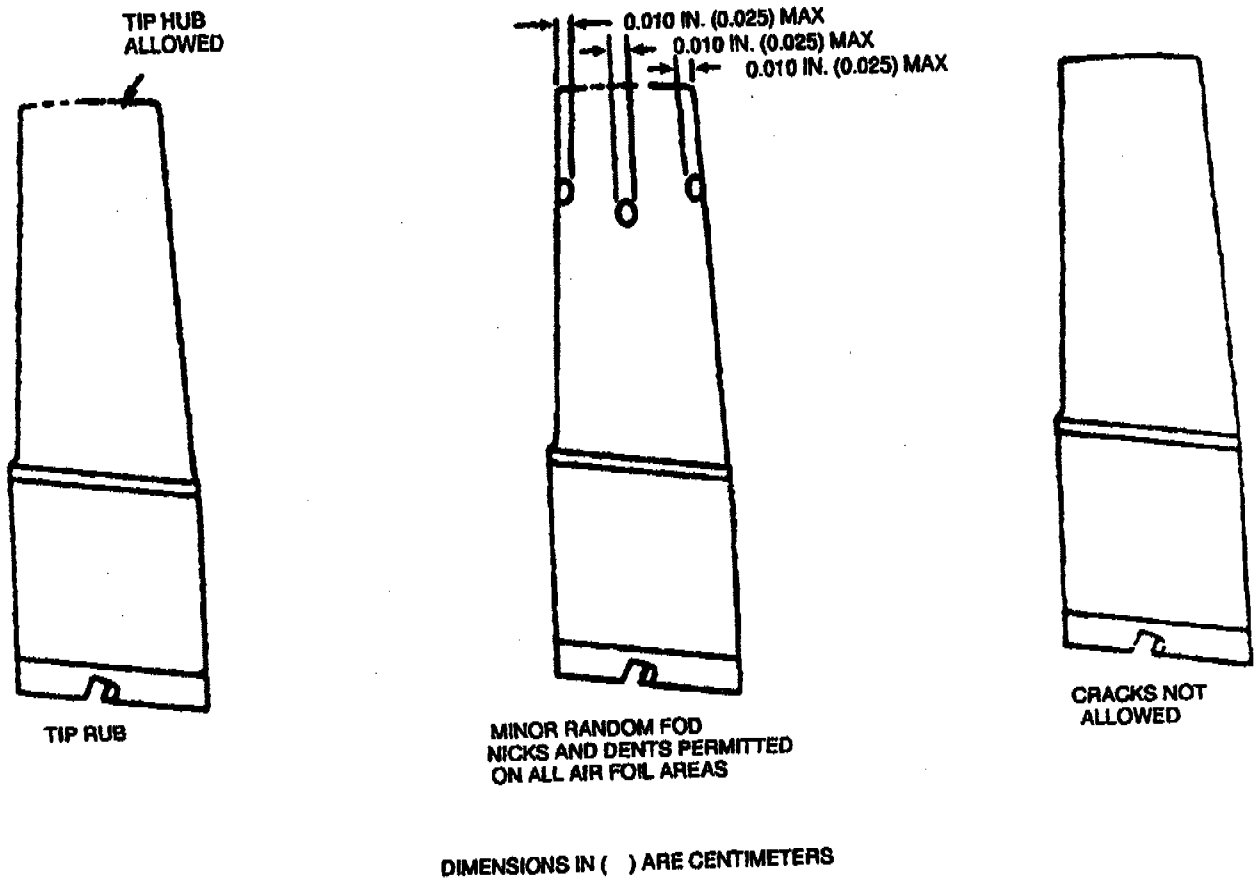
Second Stage Gas Producer Rotor Assembly Blade Damage Limits.
